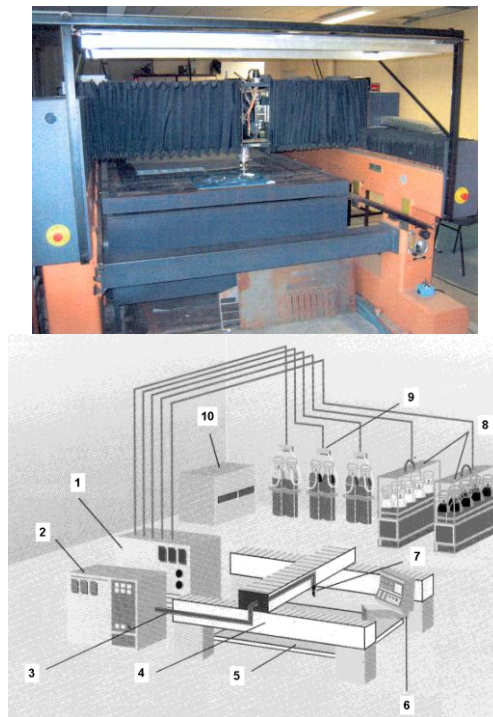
Image and scheme of the laser cutting machine: 1 - power supply block, 2 - CO<sub>2</sub> laser source, 3 - optical beam path, 4 - mechanical structure, 5 - material to machine, 6 - numerical command block, 7 - cutting head, 8 - assemblies to provide and control auxiliary gas (He, Ar, N<sub>2</sub>, O<sub>2</sub>), 9 - assembly for CO<sub>2</sub> supply, 10 - cooling block
